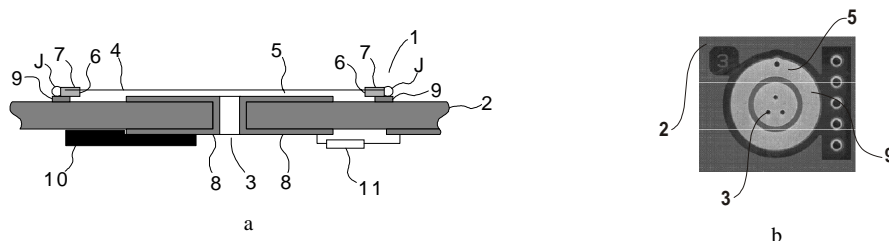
a) Cross-section profile of the microphone and b) top view of the printed circuit board with three backplate holes and electrical contact pads. 1. microphone, 2. PCB, 3. hole(s), 4. diaphragm, 5. back plate, 6. separator, 7. diaphragm frame, 8. wire(s), 9. contact ring, 10. pre-polarised plastic, 11. electrical component(s) and JFET, J electrical junction (conductive adhesive).
